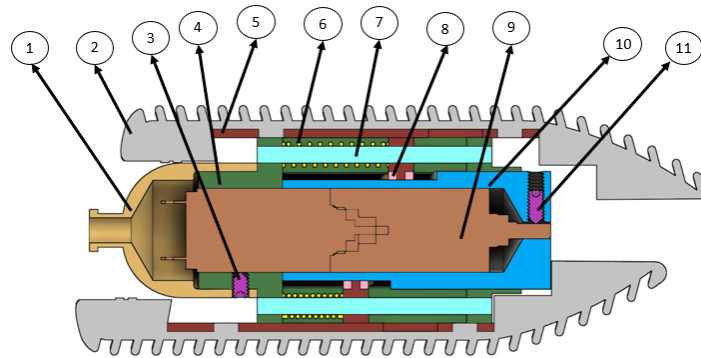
Sectional view. 1.Back cap, 2. 3d printed attachment, 3. Set-screw to connect motor to the frame, 4. Main frame, 5. Slider, 6. Spring, 7. Rod, 8. Bearing, 9. Motor, 10.Cam, 11.Set-screw to connect cam to the shaft of the motor.
